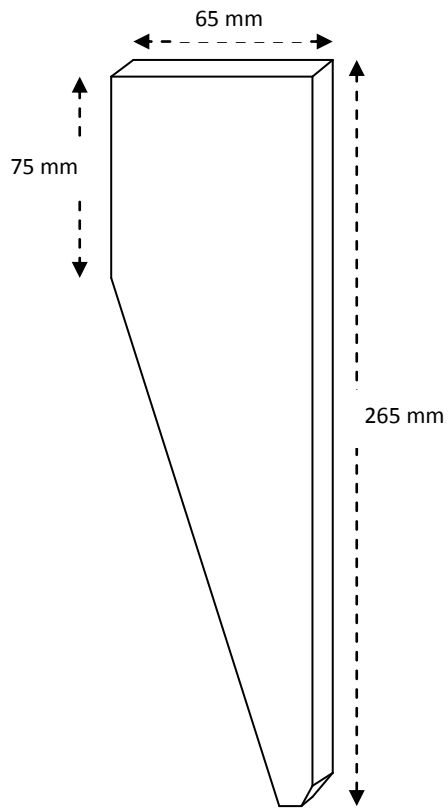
The mock broach made from 10 mm thick mild steel with dimensions shown.
